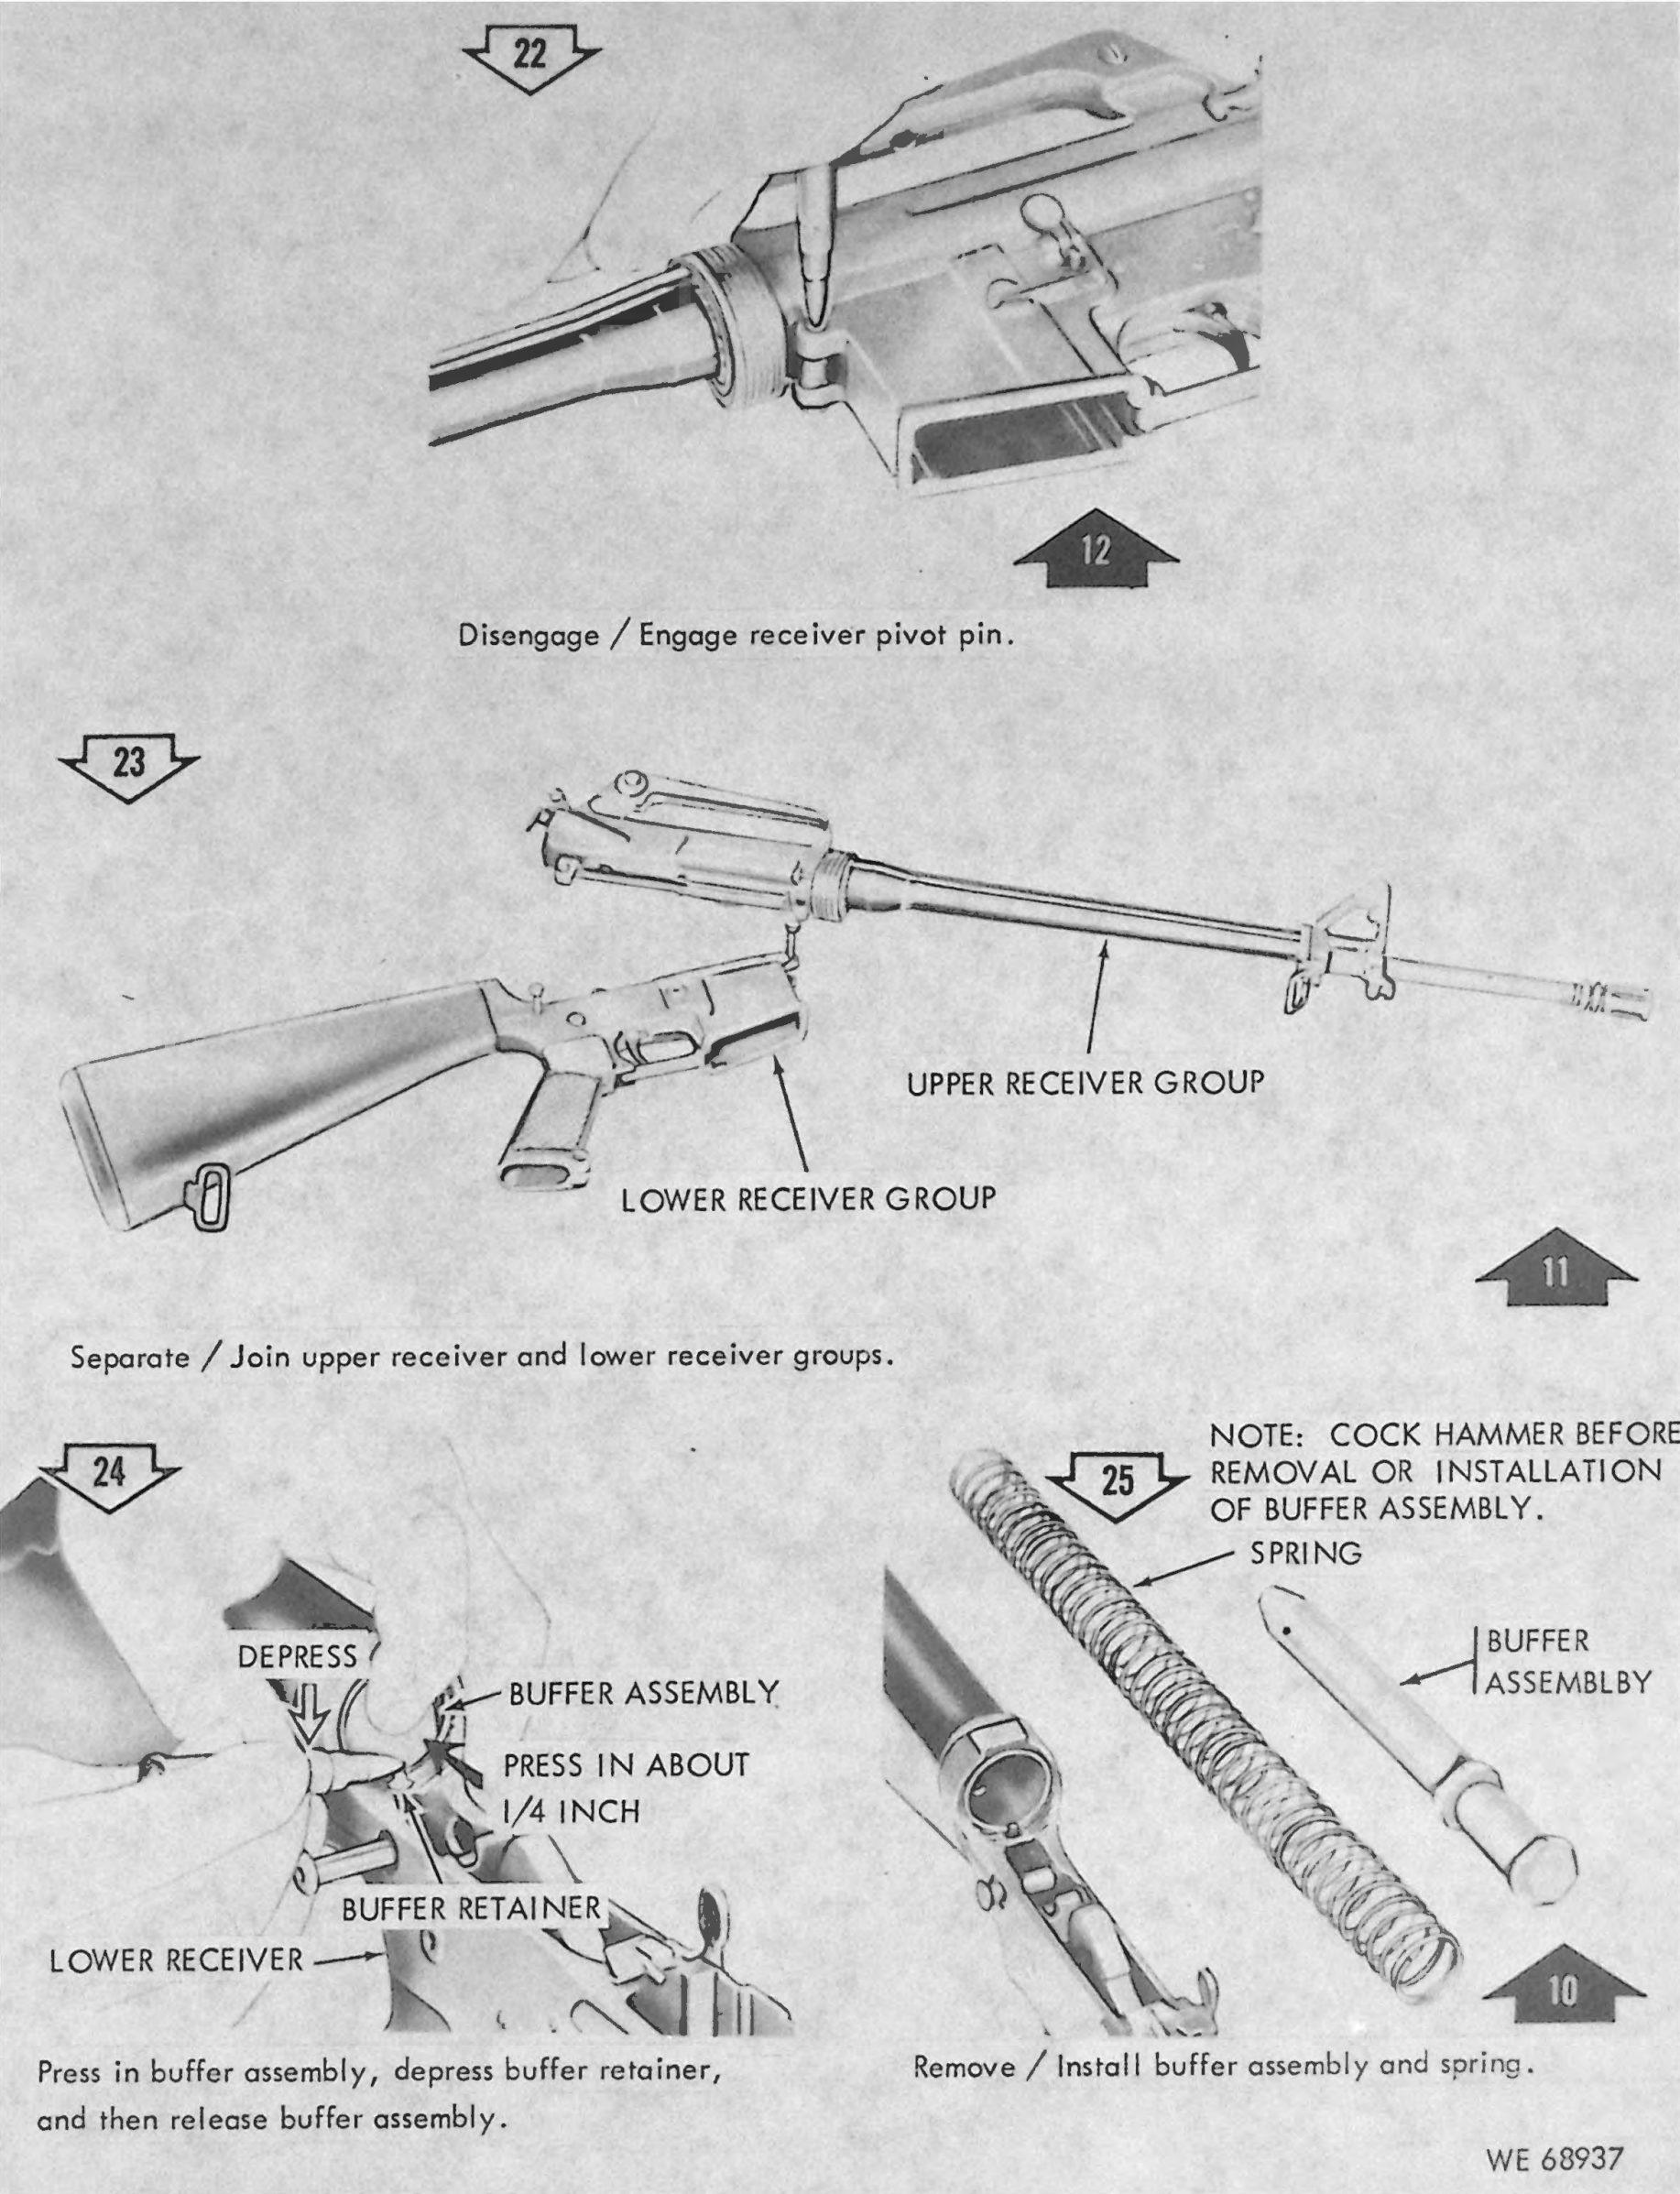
Disassembly/assembly of rifle. (5 of 8)
